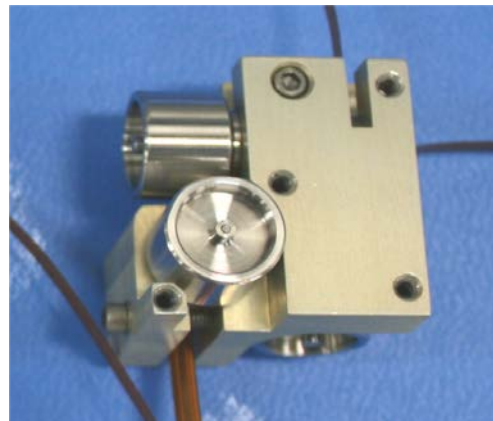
Photograph of our 3-axis reaction wheel assembly.
